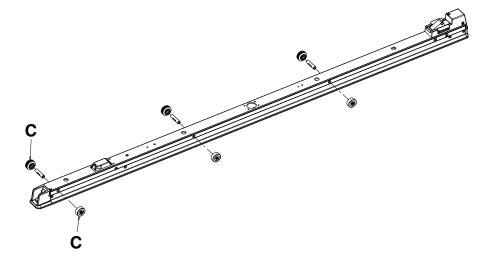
Remove the flat roller assembly and V-guide roller assembly
